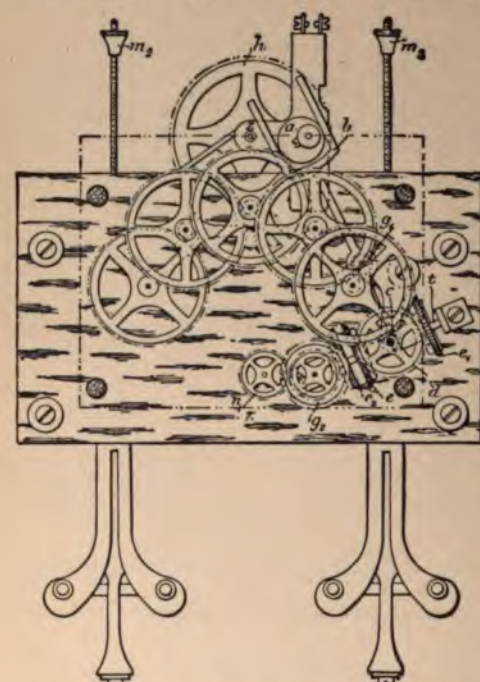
Aron Meter—Front Elevation of Reversing Mechanism
